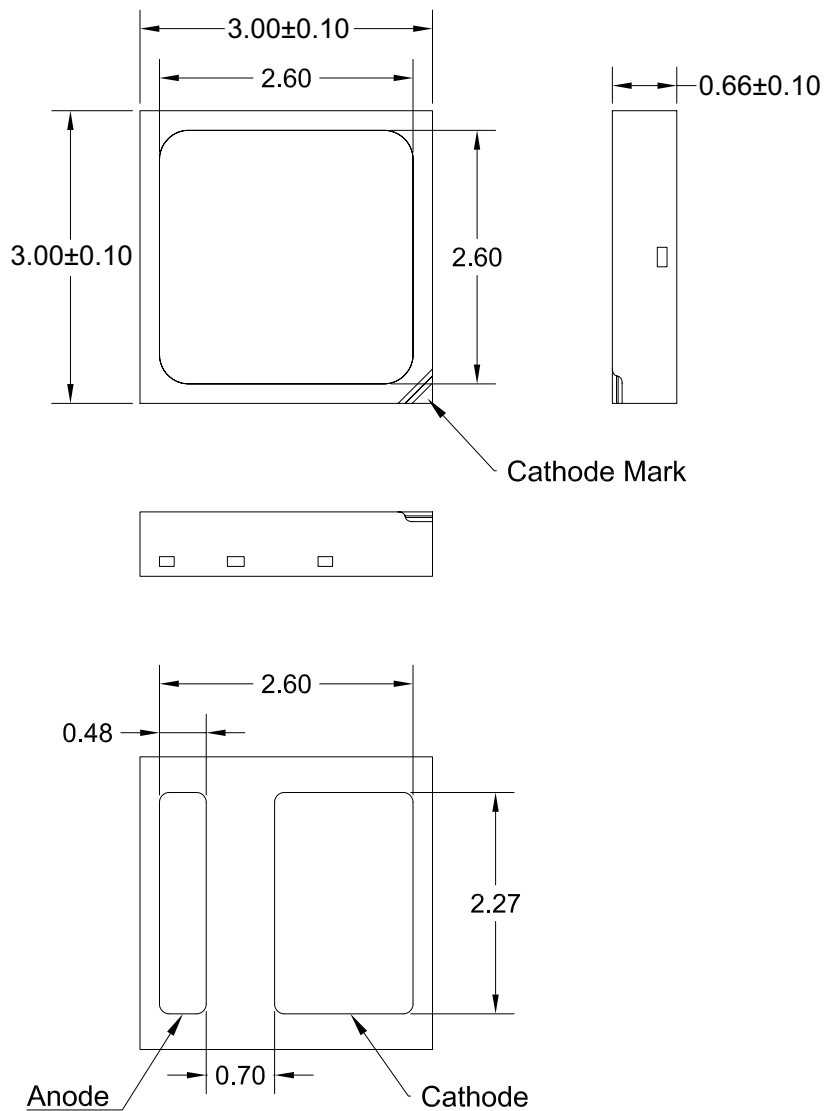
Mechanical dimensions for LUXEON 3030 HE Plus – Deep Dimming.
